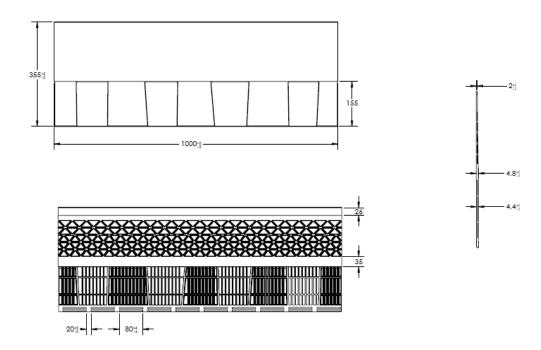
REVIA PERFORMANCE ARCHITECTURAL ROOFING SHINGLE - FRONT, PROFILE, BACK, AND DETAILS
